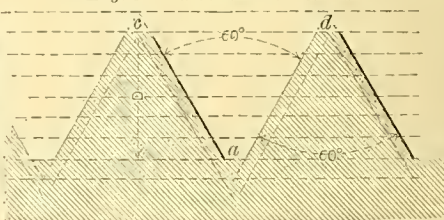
SELLERS' STANDARD SCREW-THREADS.
